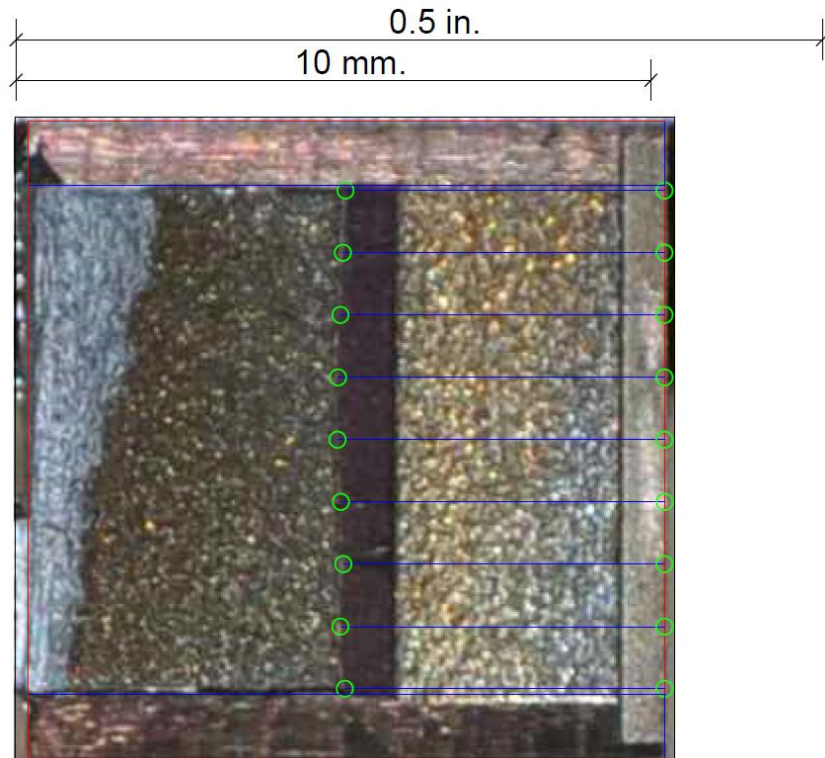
Specimen C5' Fracture Surface
